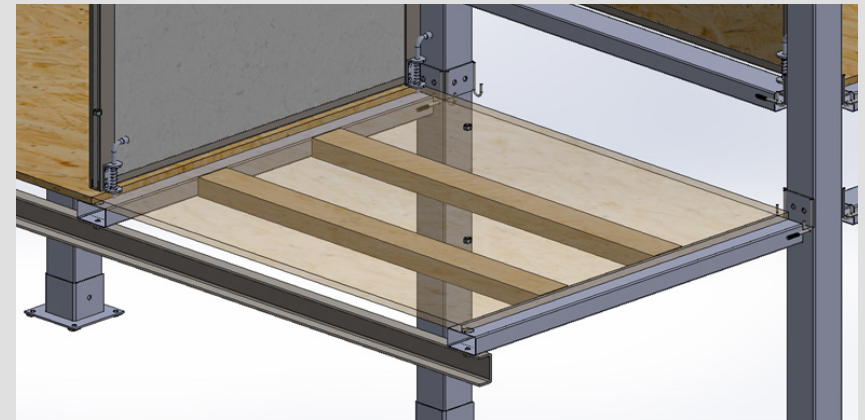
Zoomed in photo of the possible labyrinth layout with floor panel plywood set to transparent. All connection components of the labyrinth are visible such as the horizontal beams and the walls spring latch pins.
